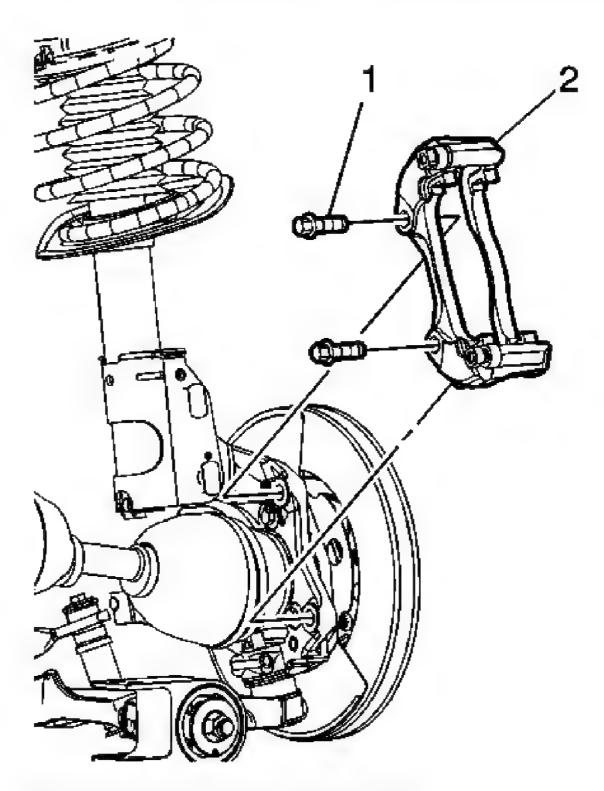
Brake Caliper Bracket And Mounting Bolts Courtesy of GENERAL MOTORS CORP.
